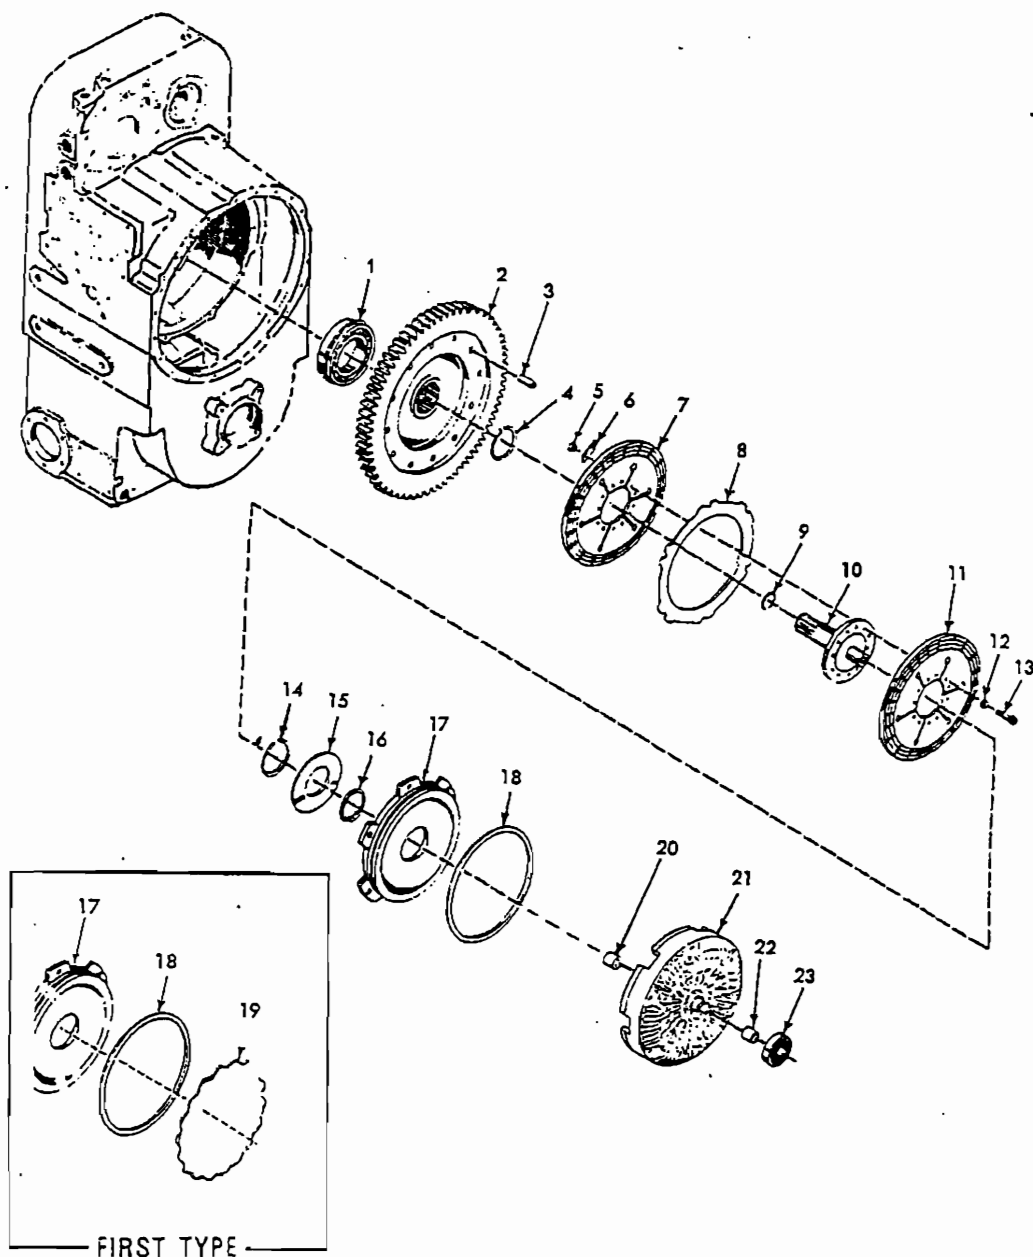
HIGH RANGE CLUTCH AND TRANSFER DRIVE GROUP
